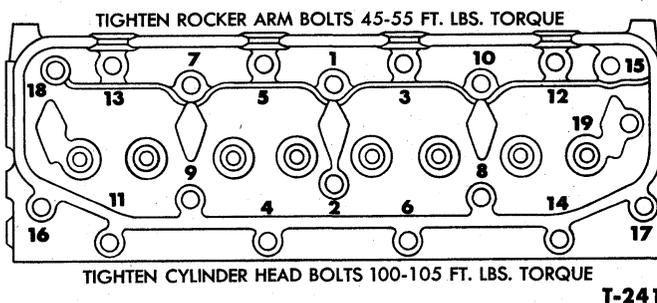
Cylinder Head Tightening Sequence (Diesel)
